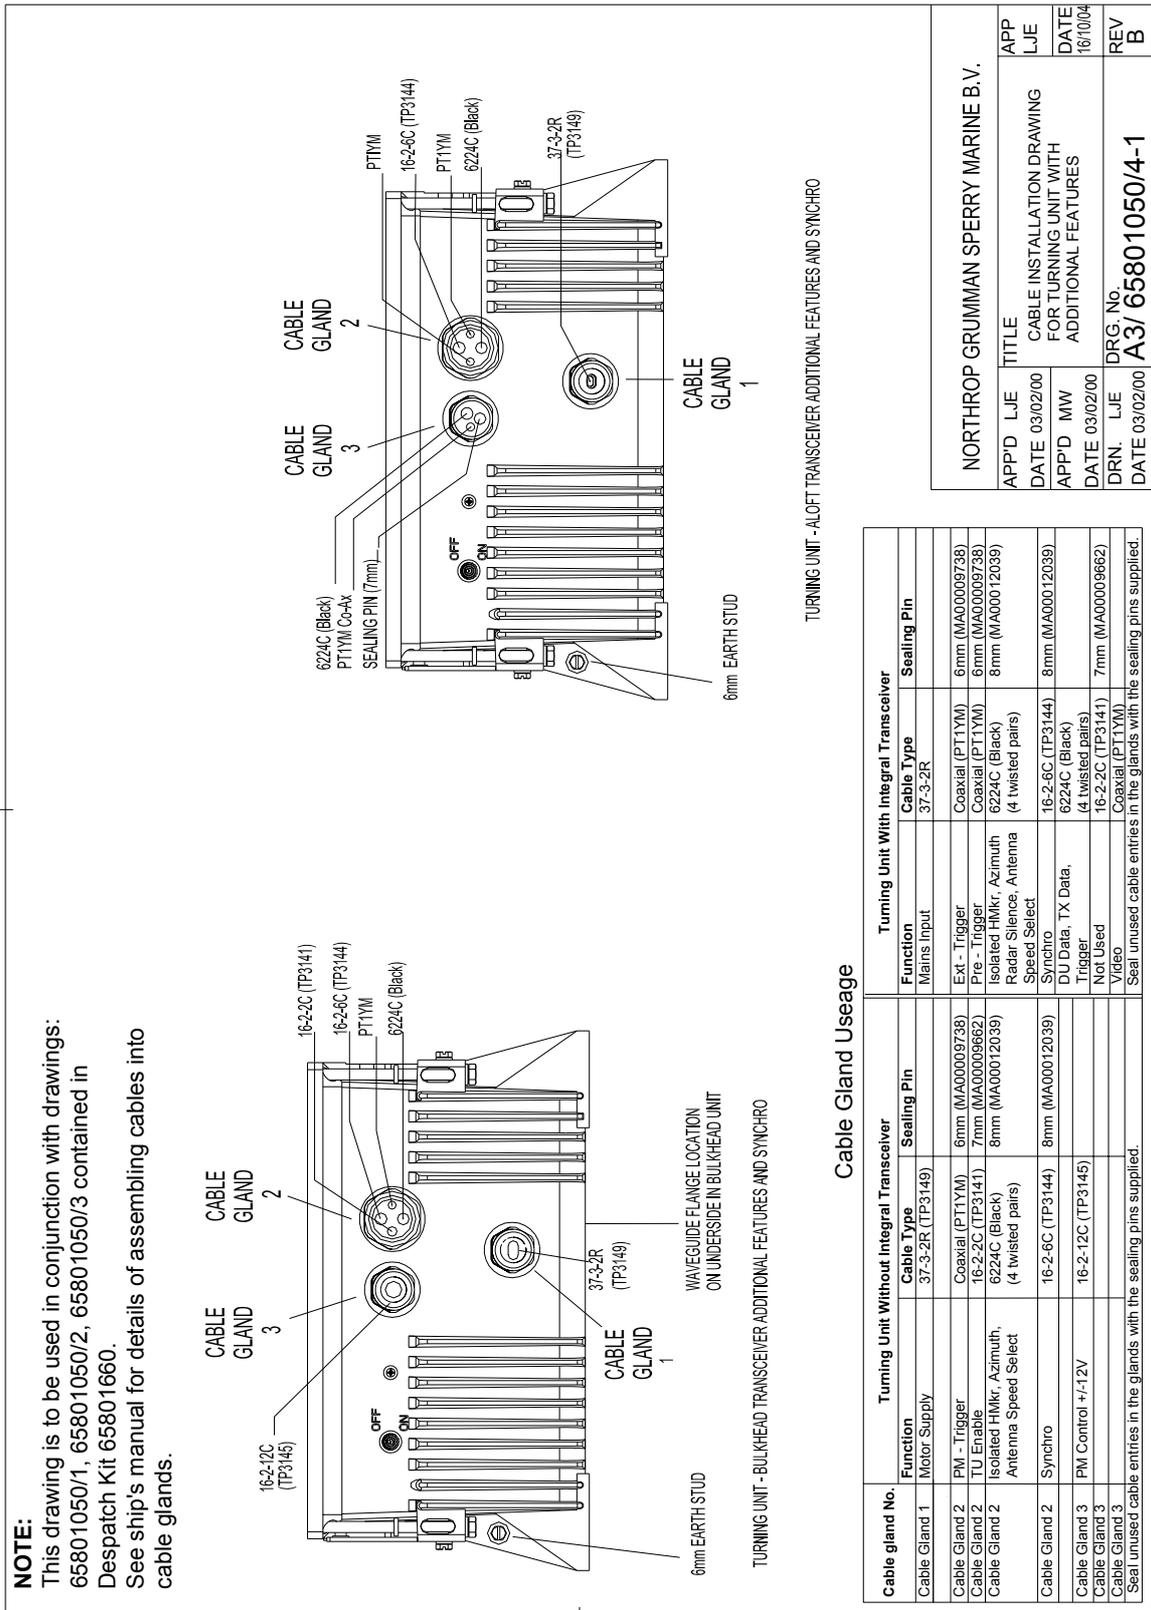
X-Band Turning Unit Cable Entry Installation Drawing
